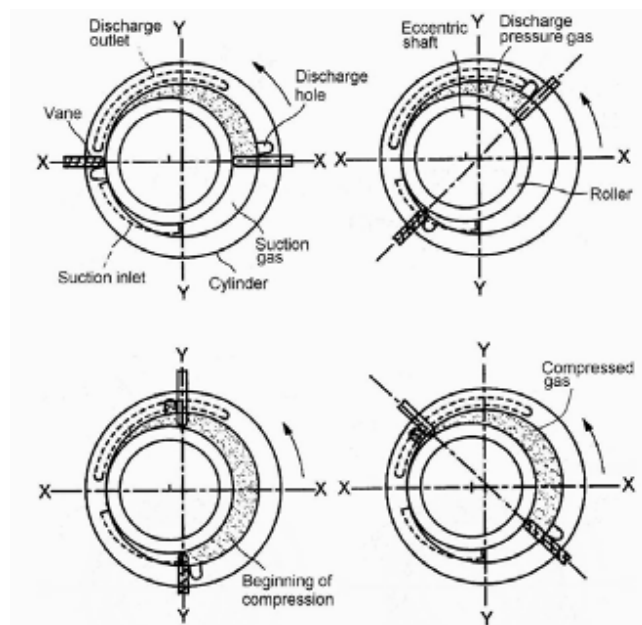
Operating principle of dual chamber rolling piston rotary compressor
